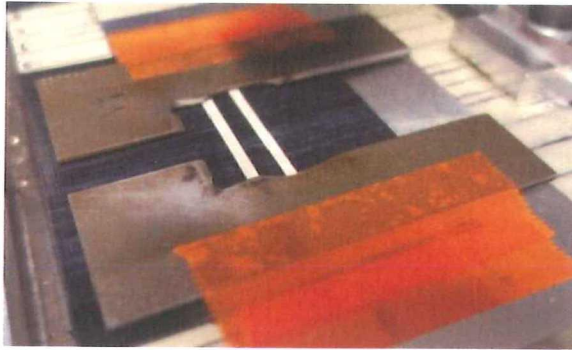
Slender ED strips are a new ED concept to weld sample clips. Both the ED strips and the alignment plates are fixed with tape.
